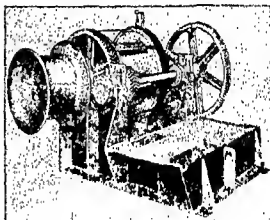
Cargo winch without motor. Note bedplate for motor.
